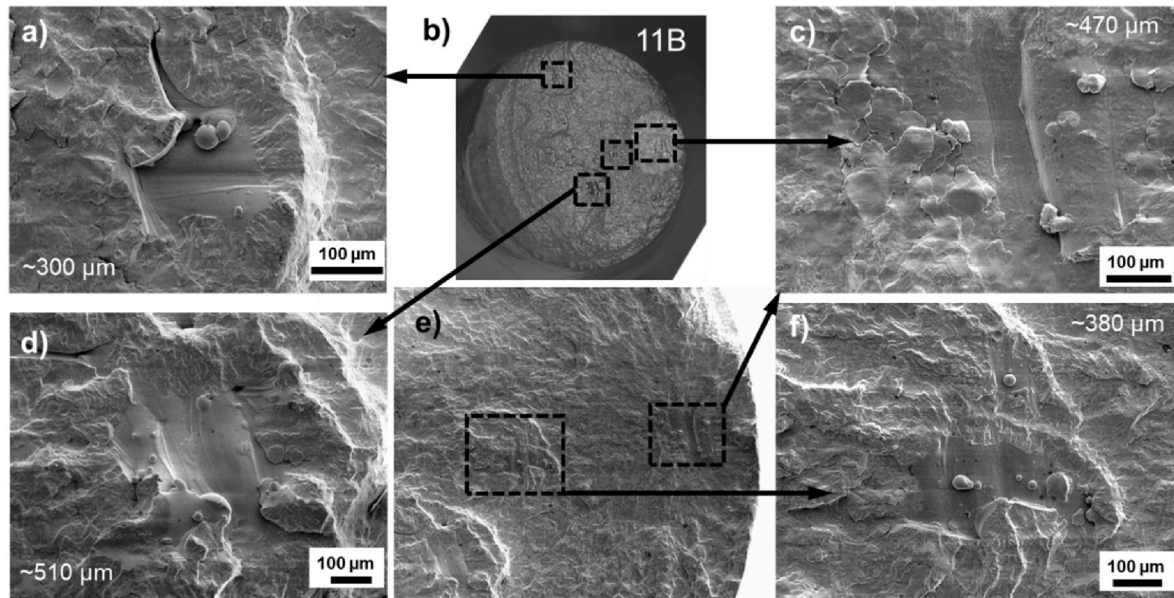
Fracture surface of specimen 11B, set B. Multiple large lack of fusion defects were identified on the fracture surface; their sizes are indicated. The images were acquired with SOM (b) and SEM (a, c-f).
